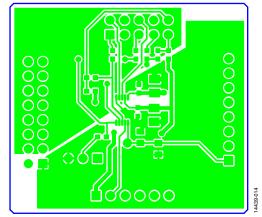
EVAL-AD5311RDBZ Daughter Board Top Side Routing
